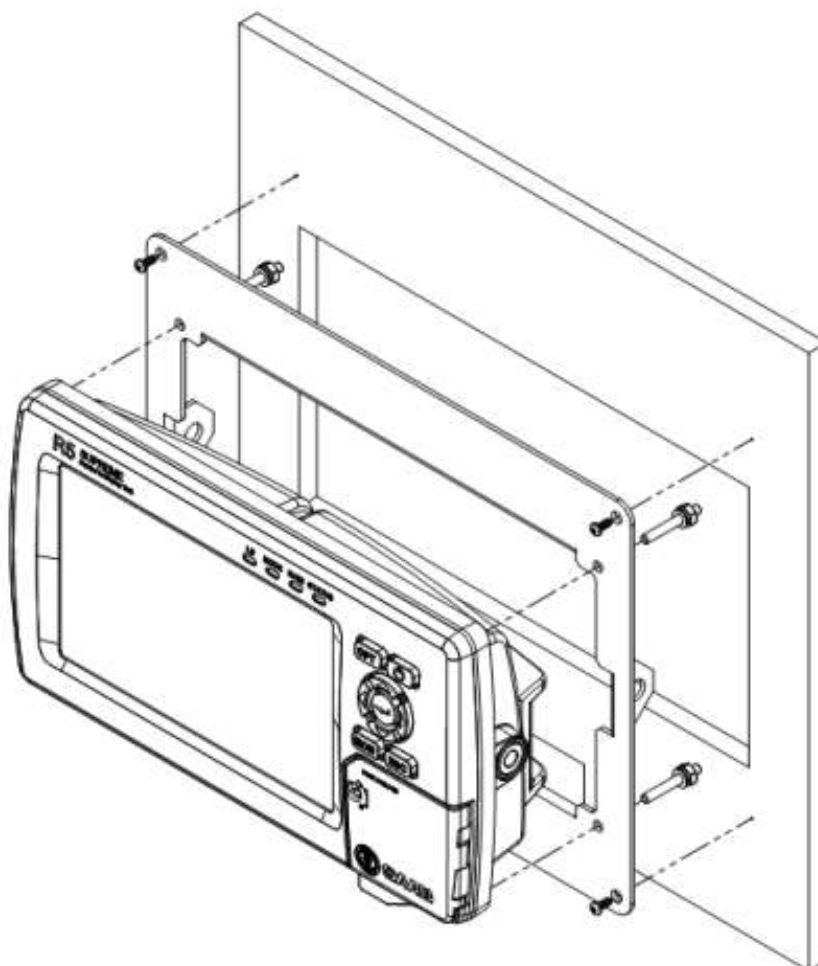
R5 SUPREME CDU, Mounting frame panel mount
